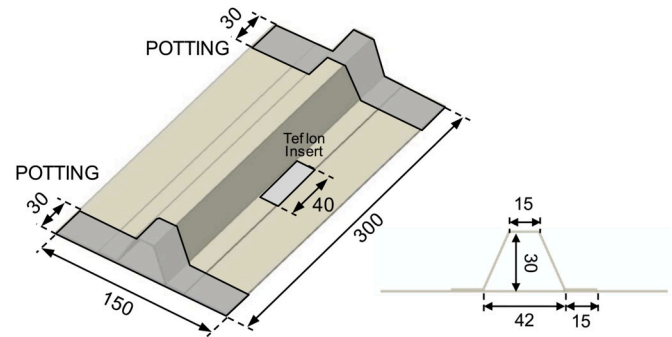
Single-stringer compression specimen: geometry (dimensions in mm).
